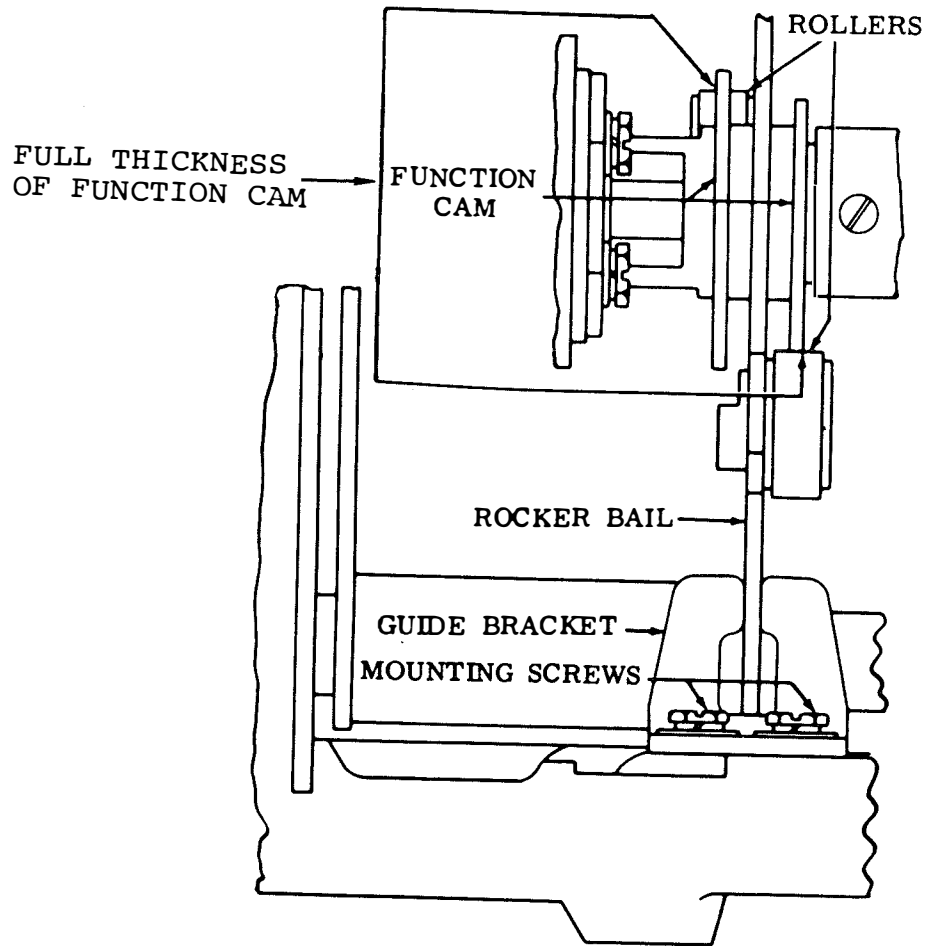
Cam Follower Roller Alignment, Right Side View
